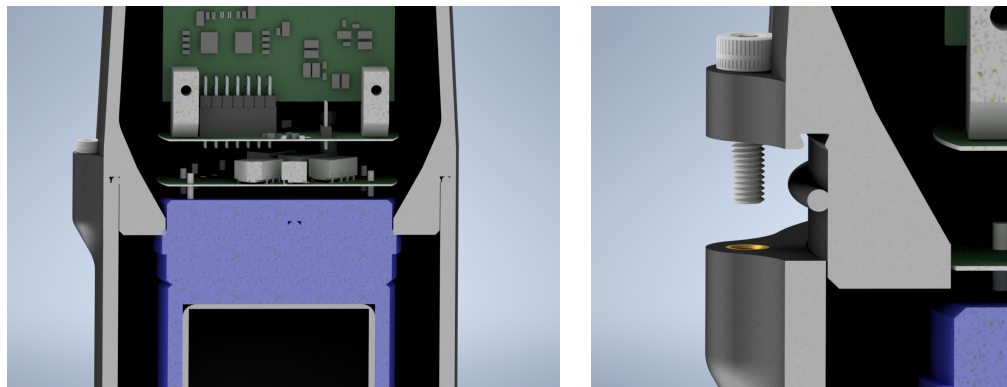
CAD rendered images showing the interfacing between the two tube sections and internal electronics. On the right, the parts are separated to show the dovetail groove for the O-ring in the top section and the brass insert in the bottom section for fastening.
